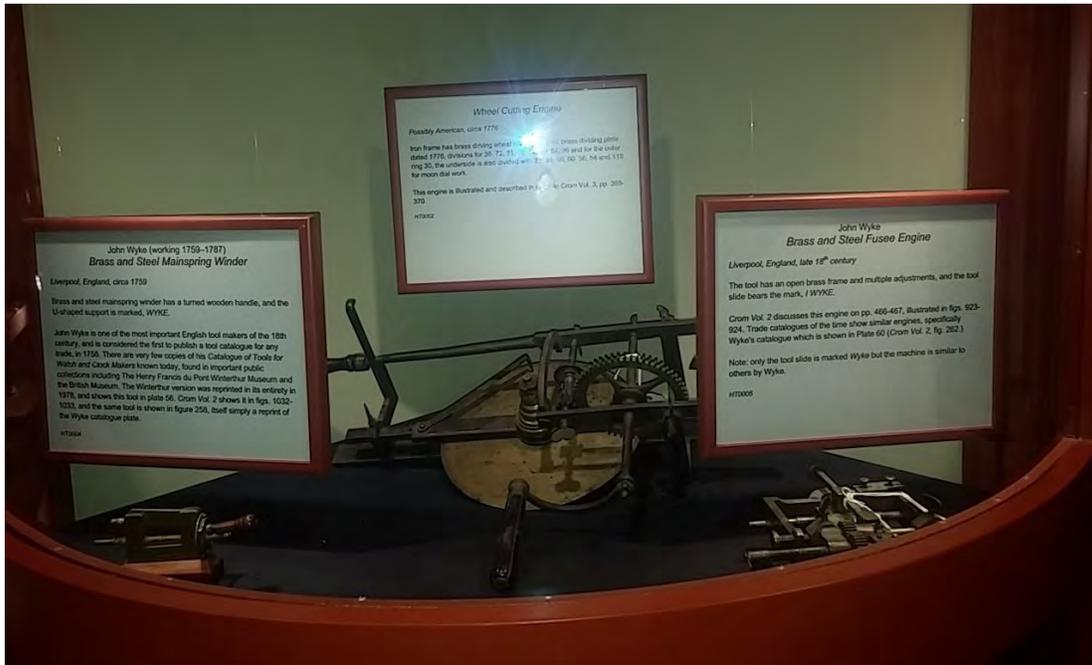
A mainspring winder, wheel cutting engine, and a fuse engine.
